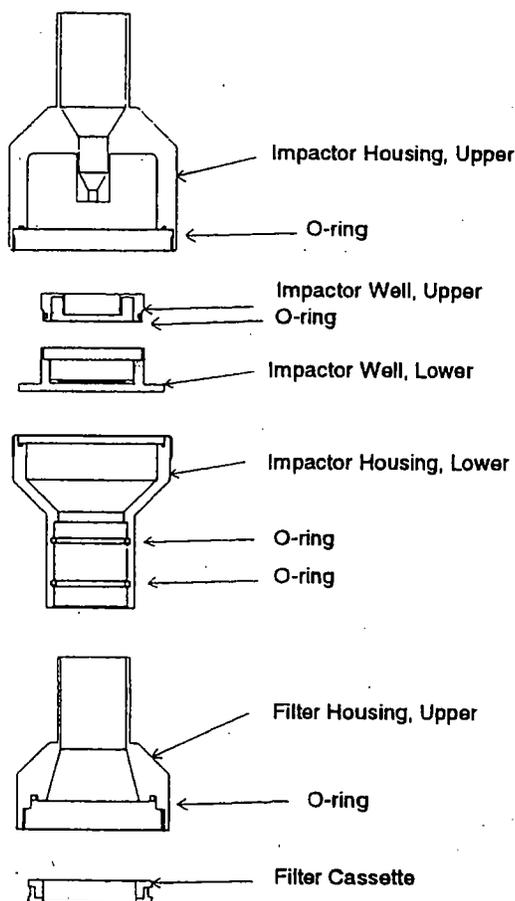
Exploded cross-sectional view of design of PM_{2.5} impactor well and filter holder.
